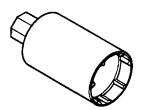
Mag Wheel & Mag Wheel Key (Socket)
